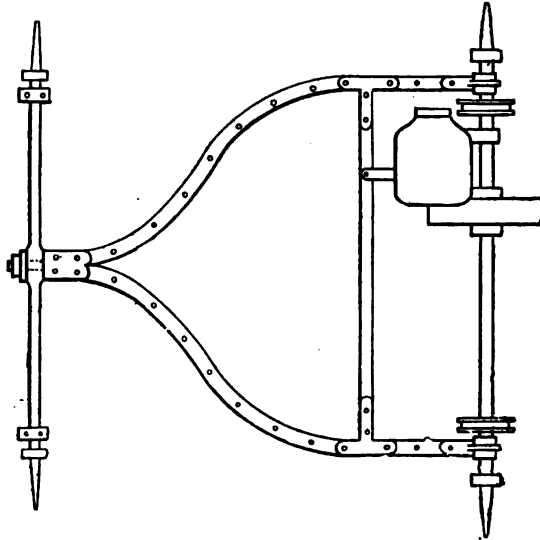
Angle Iron Underframe with swivel joint at centre of front axle.
